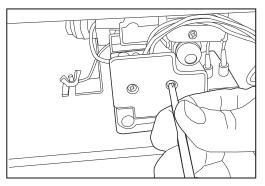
Undo the two screws at the front of the module, then remove the wiring harness, the module can then be removed.
